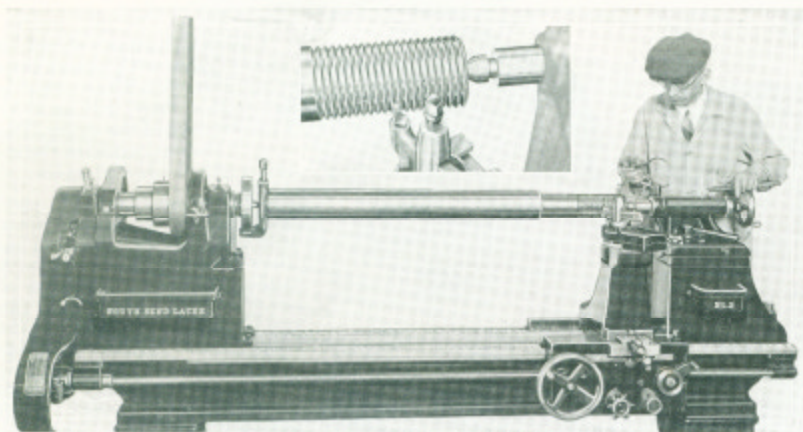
Cutting a screw thread on a 3½ inch shaft, 4 feet long on a No. 2-BE South Bend Brake Drum Lathe. The insert shows a close-up of the threads.
